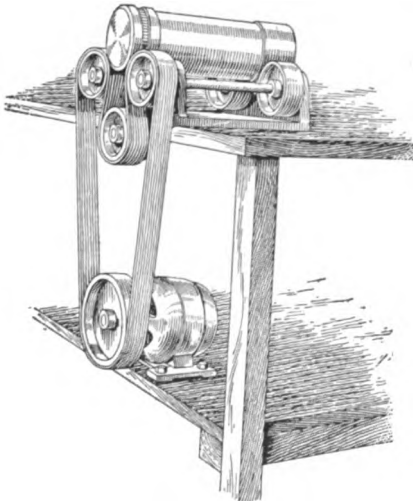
RUNNING BELT FOR THREAD INSPECTION
